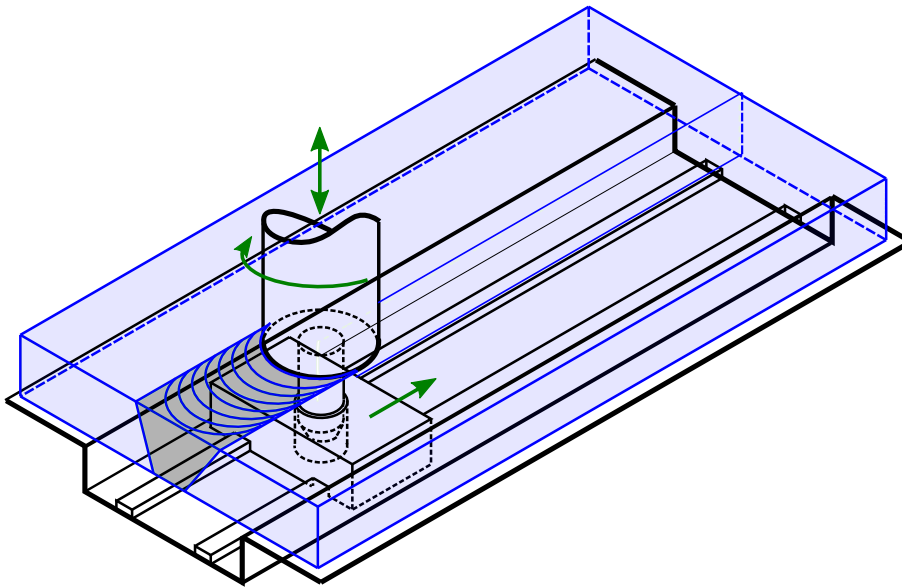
Follower backing above linear bearing and dragged by FSW pin.
